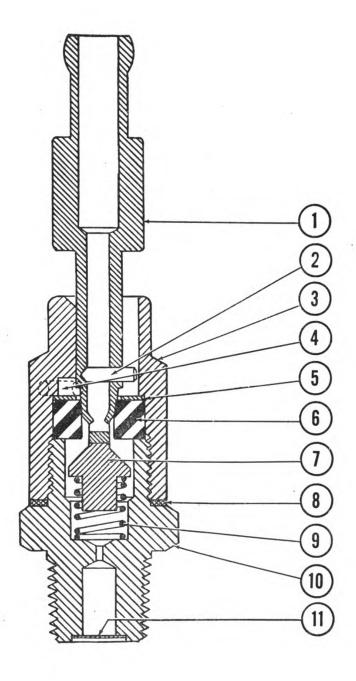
Regulator Manifold Complete, Type "A," 9R10610.
